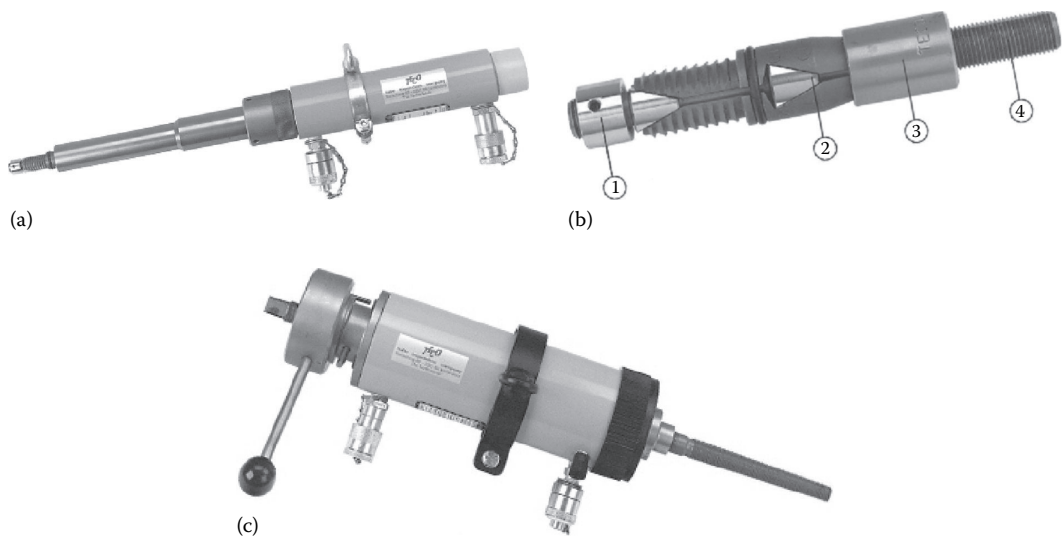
Tube puller. (a) Hydraulic ram for gripper-type tube puller, (b) hydraulic operated gripper-type tube puller for condenser tubes, and (c) hydraulic ram for spear-type tube puller. (Courtesy of TECO Tube Expanders Company, Leiderdorp, the Netherlands.)
